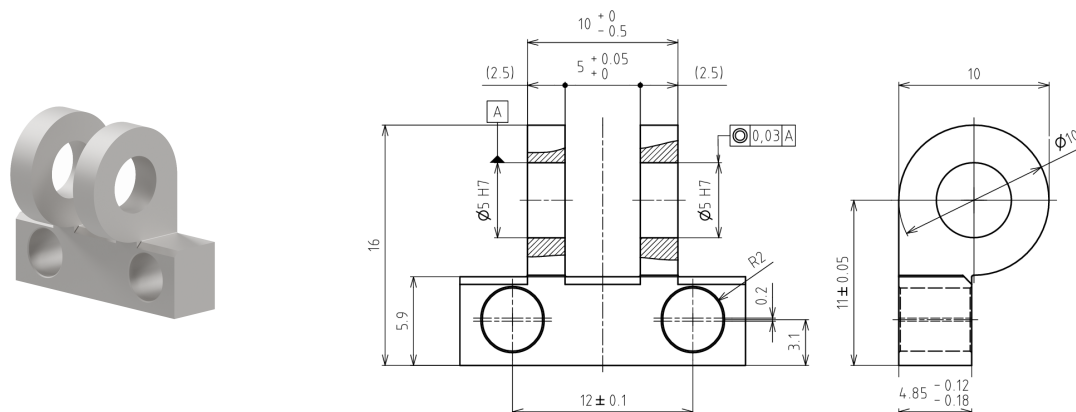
Drawing of clamp 1 (dimensions in mm)
